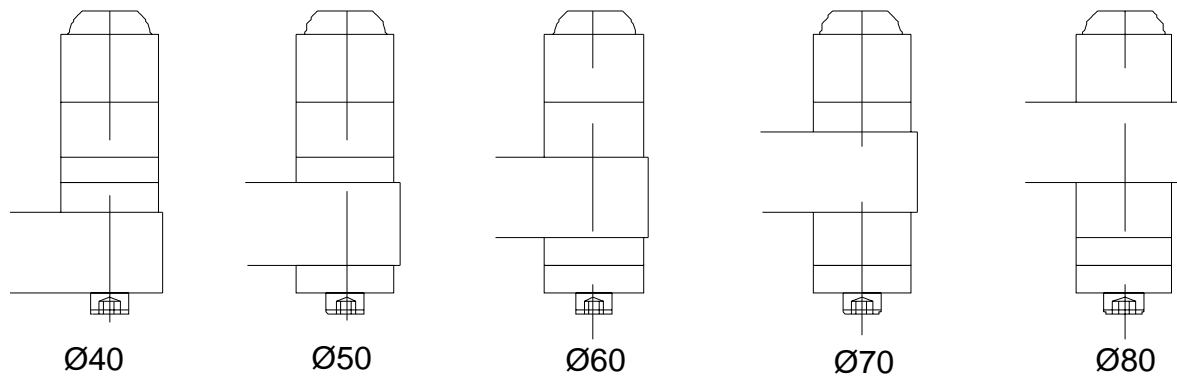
The spacers on the gripfingers can be moved in order to change the gripping diameter on the gripper, the figure above shows the gripping fingers on the RobExtractSpray for IRB 2400.
